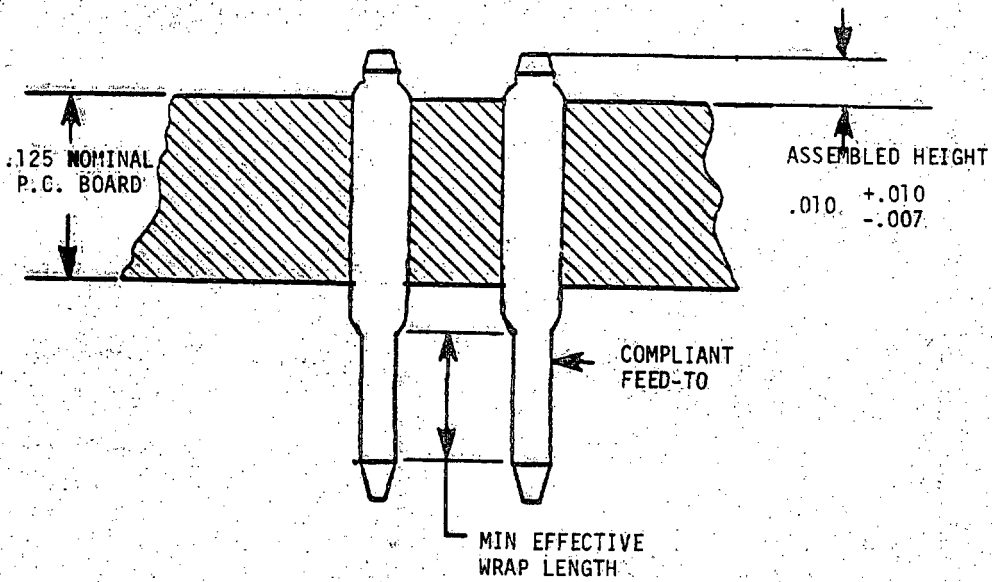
Cross-sectional view of printed-wiring electrical backplane assembly. - Continued
